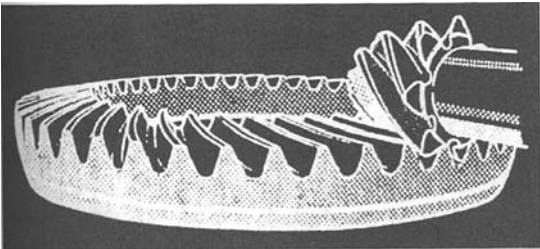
Spiral bevel gears. (Courtesy of Lubrizol Corp.)
